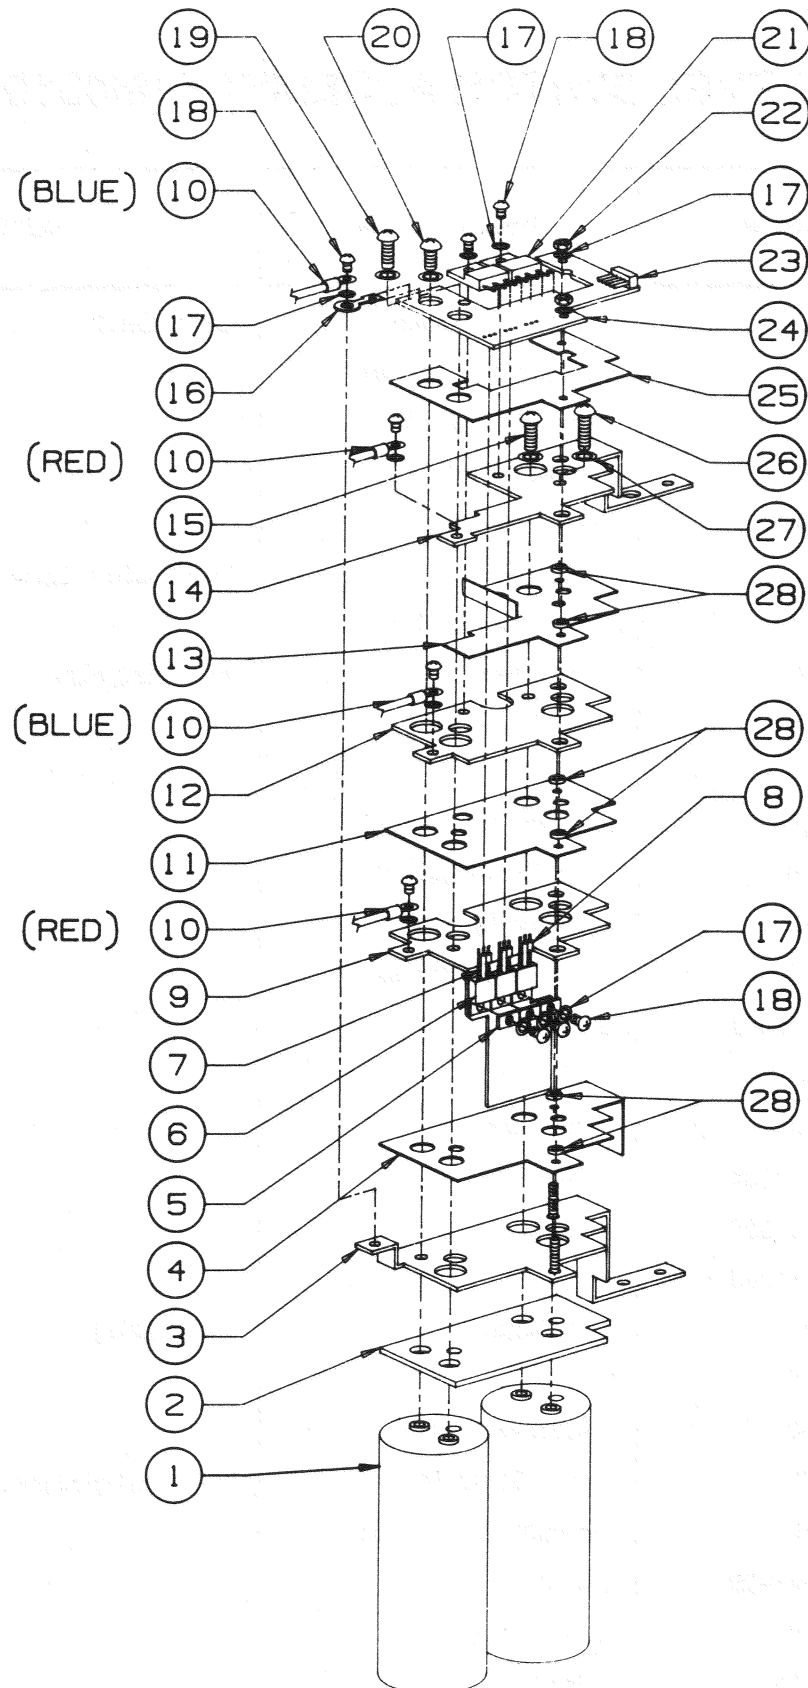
Channel 1 Bi-Level Switch Assembly
